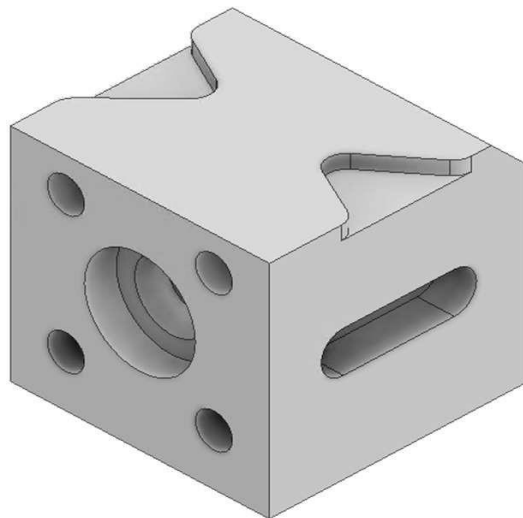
Part design to be cut on the CNC, handled by the robots, and inspected by the CMM
